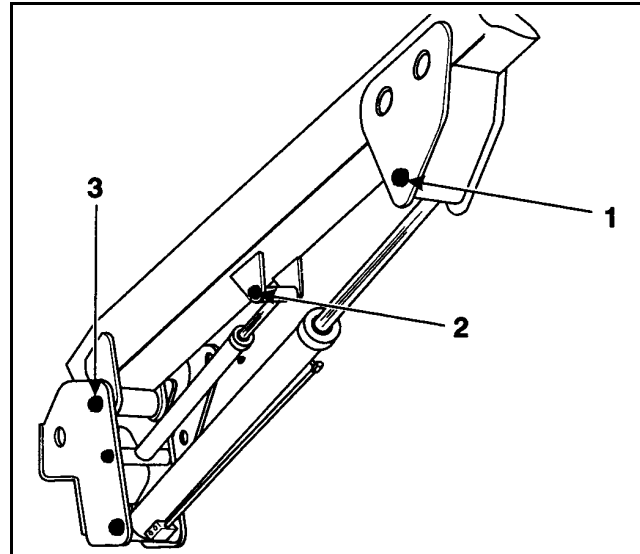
Location of Components - Removal of Base Boom. (Models 35/n35/40/n40/45)
